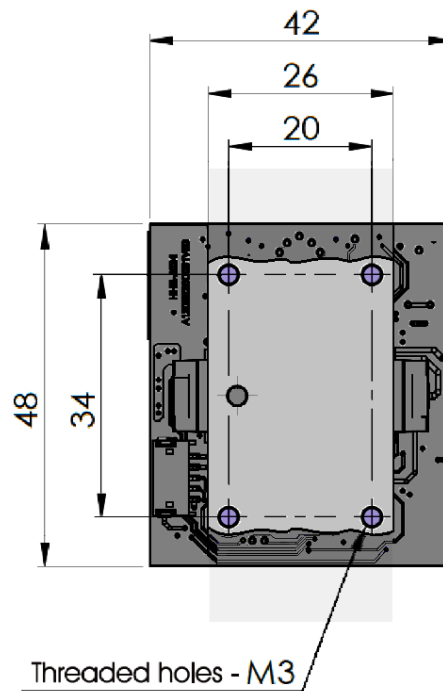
Dimensions of the four mounting points with M3 screws for all OEM devices
